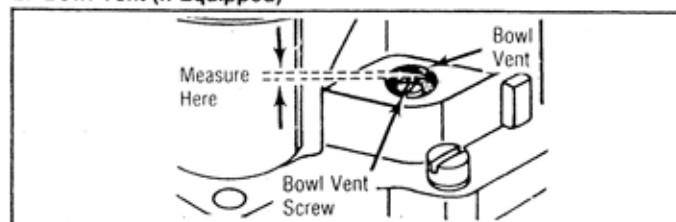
Bowl Vent Adjustment (Early Type - If Equipped)
